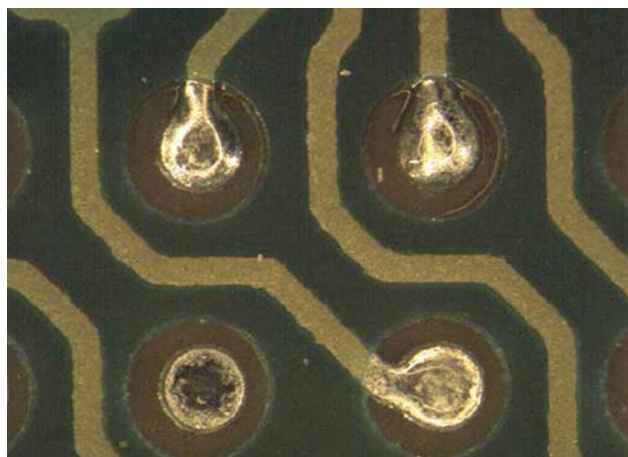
The faulty solder print can also be seen on a printed pattern with the same geometry next to the defective BGA.
